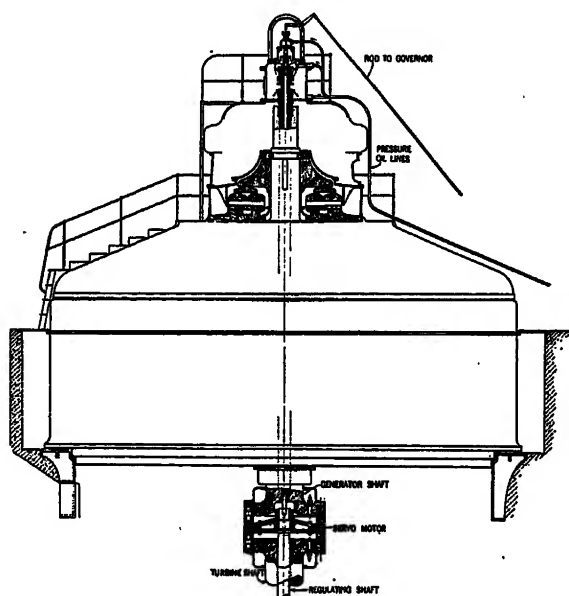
DETAILS OF THE KAPLAN TURBINE ARRANGEMENT OF THE SERVO MOTOR BETWEEN THE TURBINE AND GENERATOR SHAFTS
